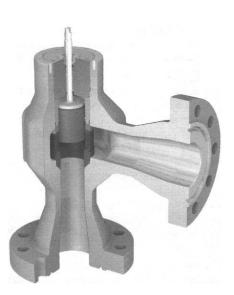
High pressure angle choke valve Courtesy of Mokveld Valves BV
